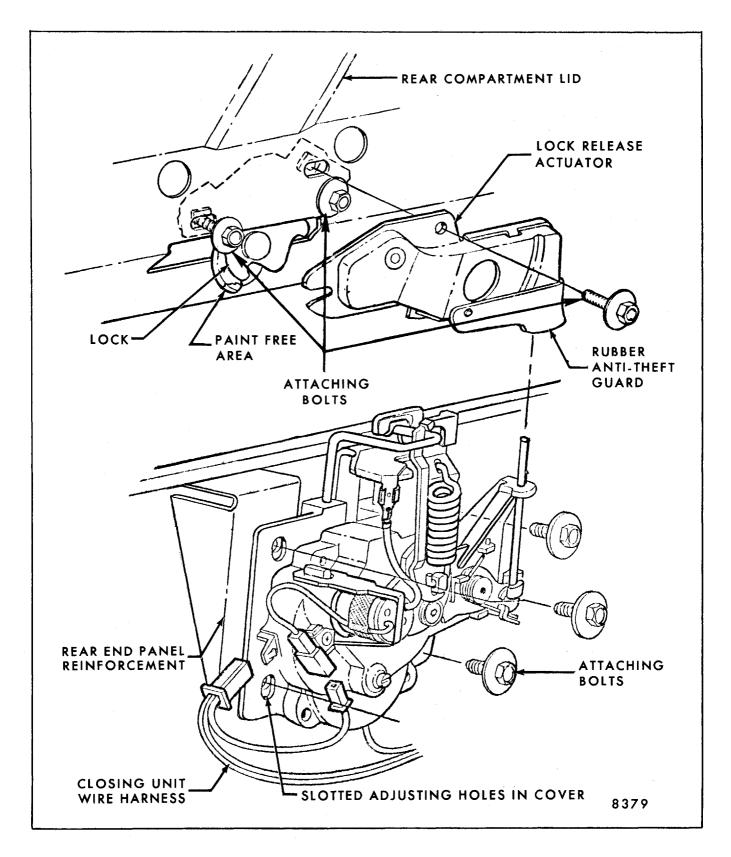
Electric Closing and Release Unit Mounting - Cadillac E Style
